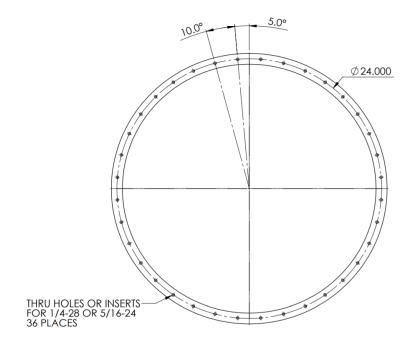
STANDARD 24-INCH RING MOUNTING INTERFACE BOLT PATTERN
